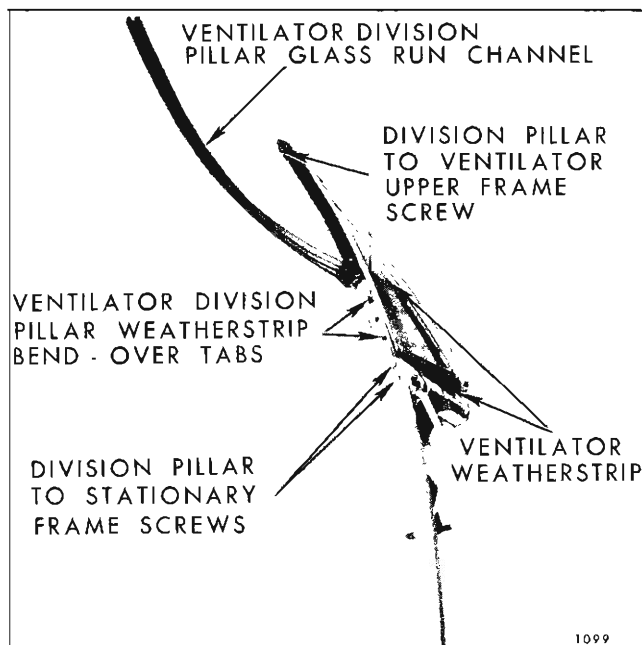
D69—Rear Door Ventilator Assembly - 68069 Style
